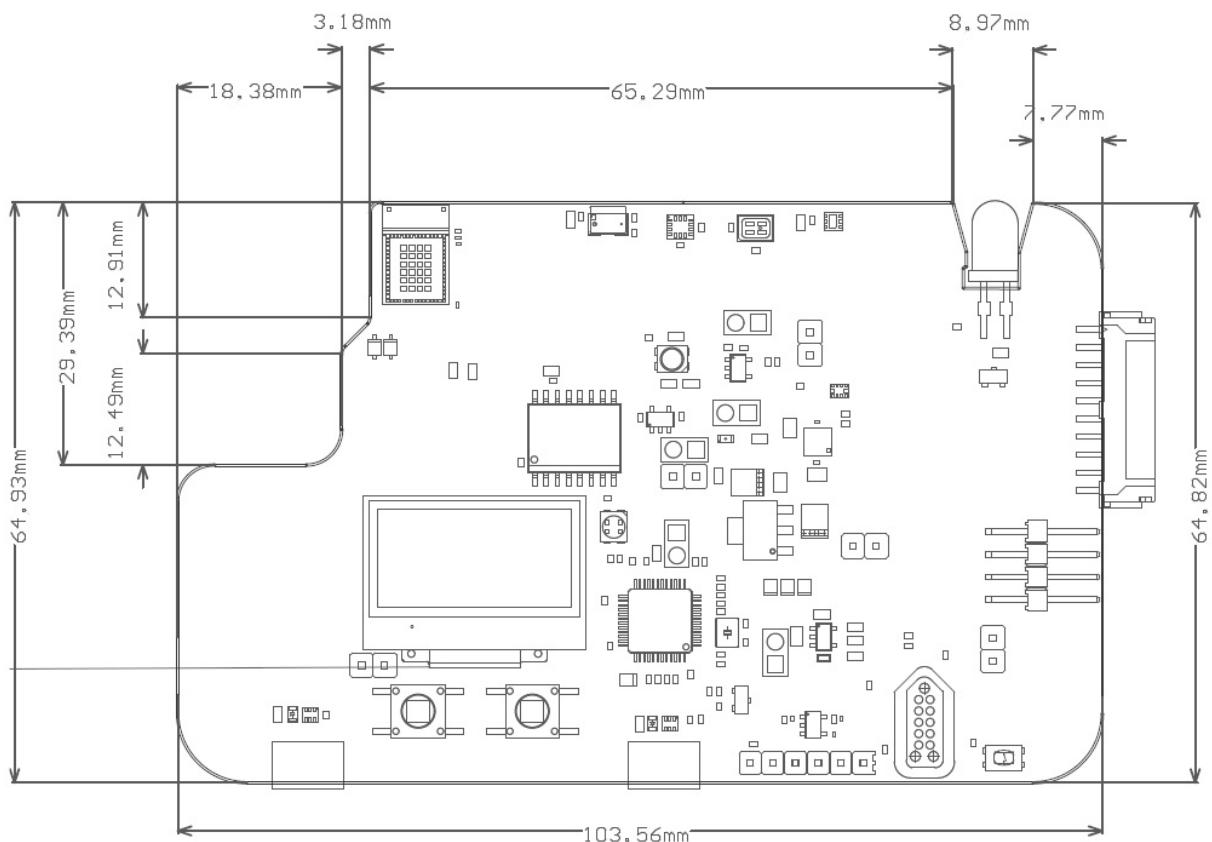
STM32WB5MM-DK board mechanical dimensions (top view, in millimeters)
